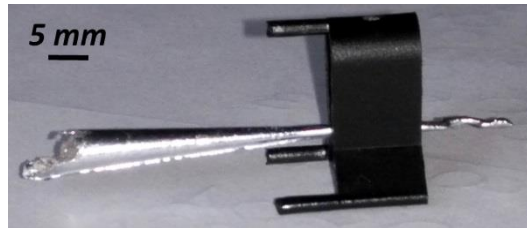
AlSi10Mg cone produced by Copper Mould Casting.
